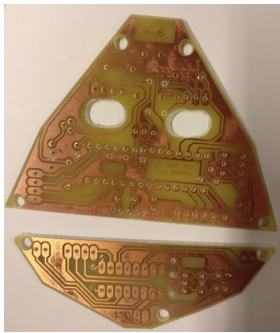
The PCBs for Squeak with drilled holes and without any components attached.
